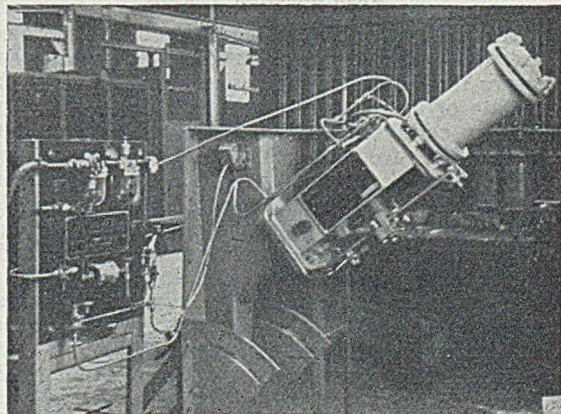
Model Set-up of the Feeder Machine, showing Air Connections and Control Panel.
